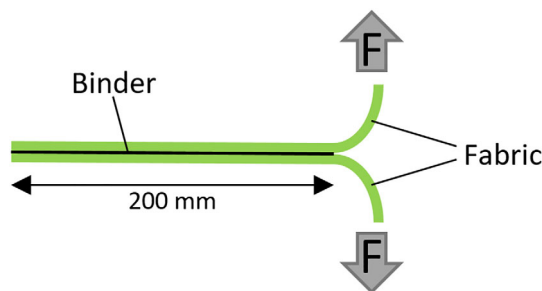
Schematic drawing T-peel test DIN EN ISO 11339
